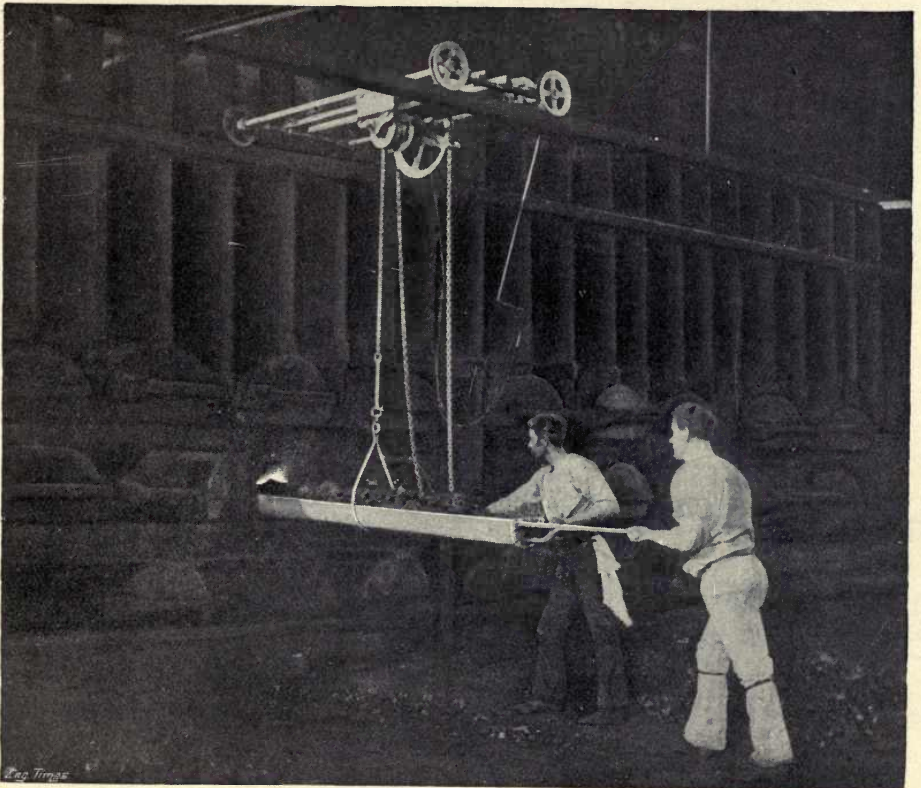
WEST'S MANUAL CHARGING AND DRAWING MACHINES.
